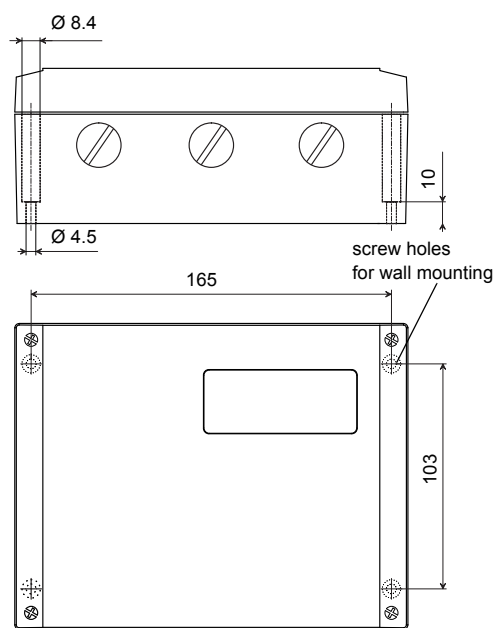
FLUXUS WD100, WD200 (dimensions in mm)
